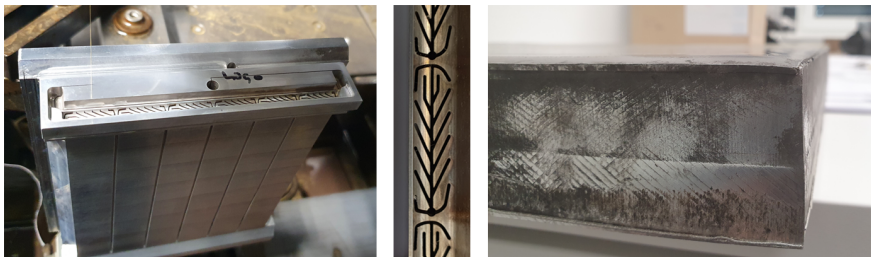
Left side: Manufacturing the target main body prototype via wire erosion out of one solid aluminium piece; centre: enlarged view of the micro channel structure with outdated start hole positions; right side: test sample of explosion clad plate of tantalum (3 mm on the top) and aluminium (50 mm on the bottom)
